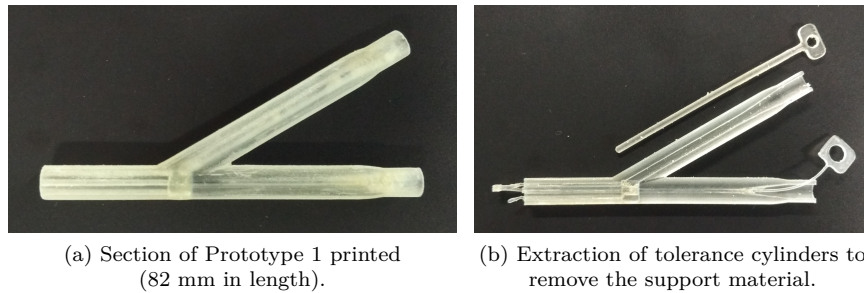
Preliminary tests carried out with the Objet30 Pro 3D printer.
